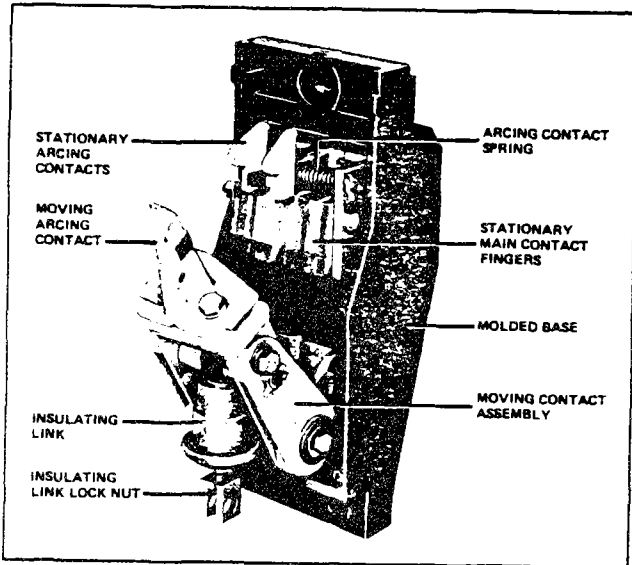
Type DS-420 Pole Unit Assembly - Front View (391101)
